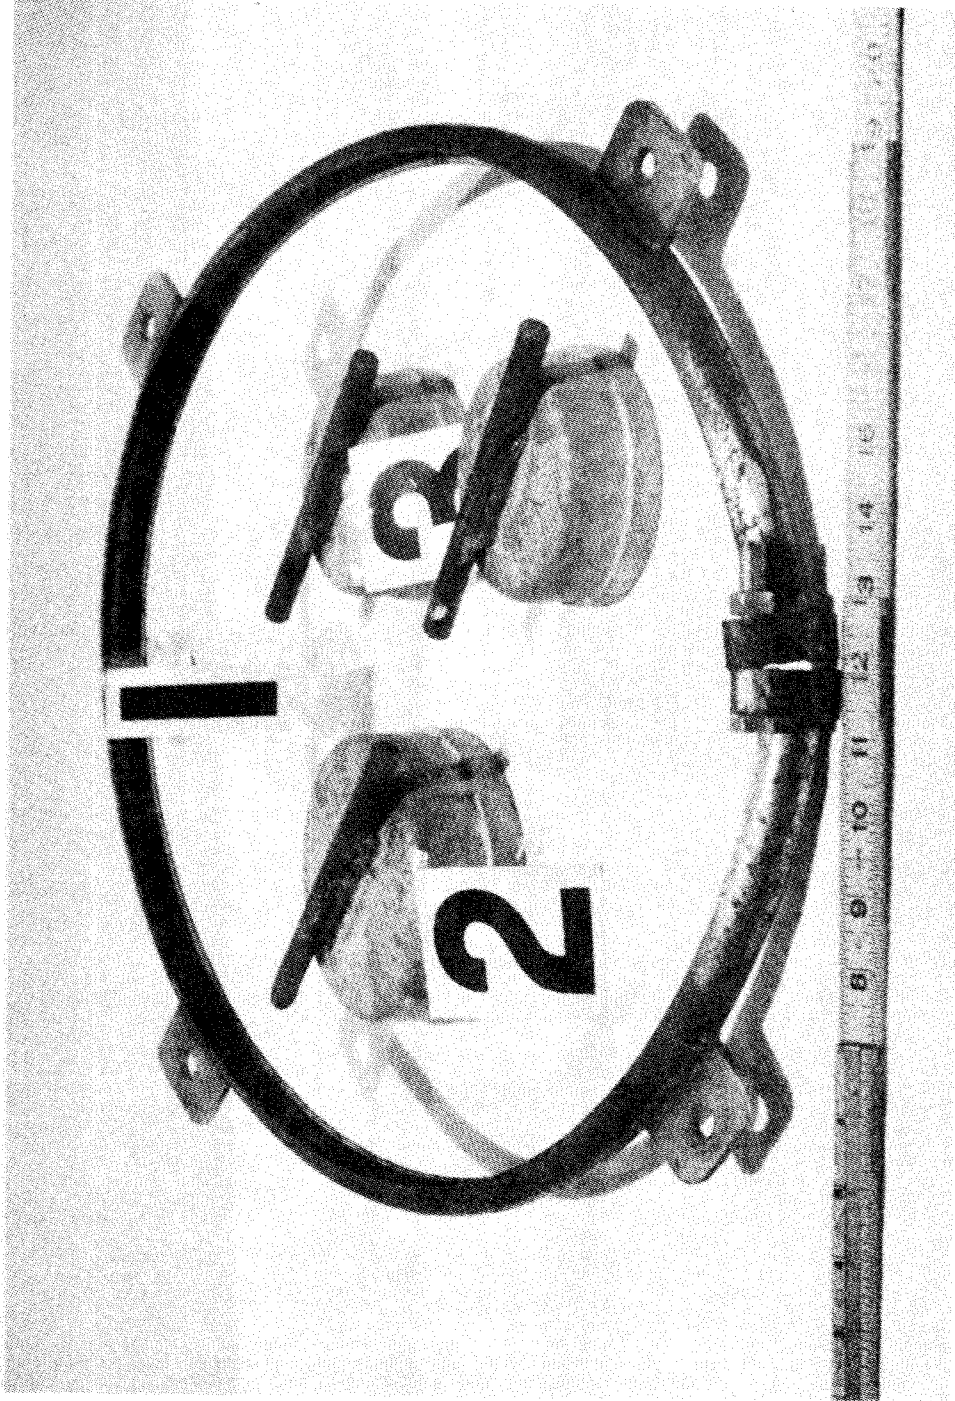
Lock ring and welded tabs. Also pictured inside the lock ring (#1): the ash cleanout cover cap (#2), and the ignition cover cap (#3).
